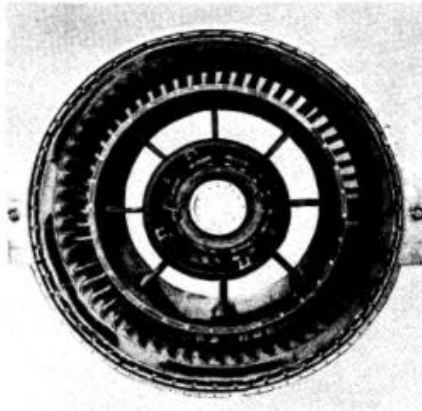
CJ805-21 AFT FAN FRAME ASSEMBLY
